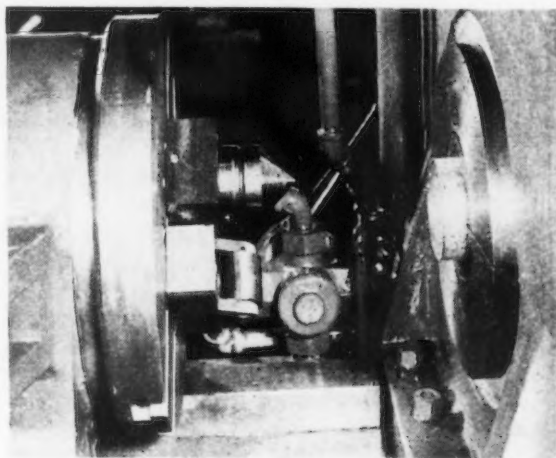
Conical roller flares the tubing and is then retracted to permit the cylindrical roller to flatten the flare into a flange.
